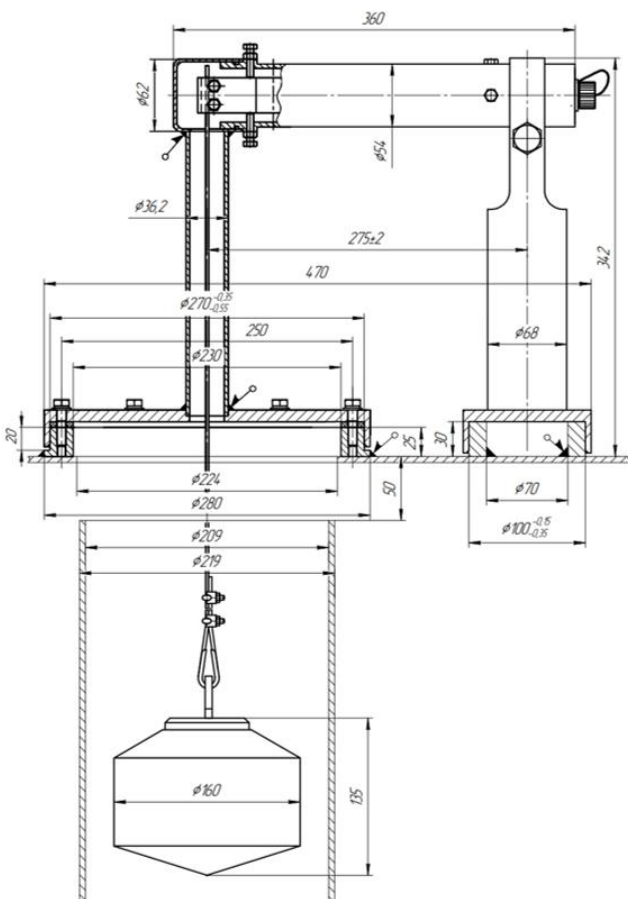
The DN-130(P) overall dimensions in enclosed configuration
